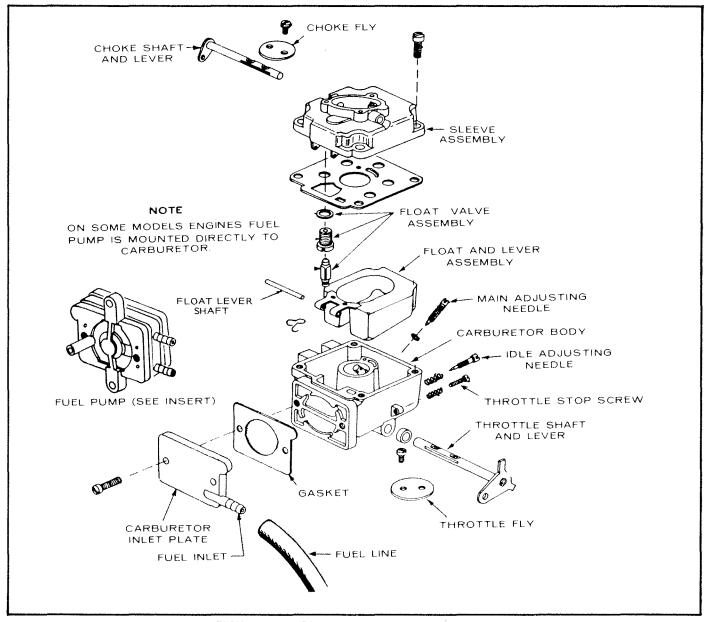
EXPLODED VIEW OF CARBURETOR
